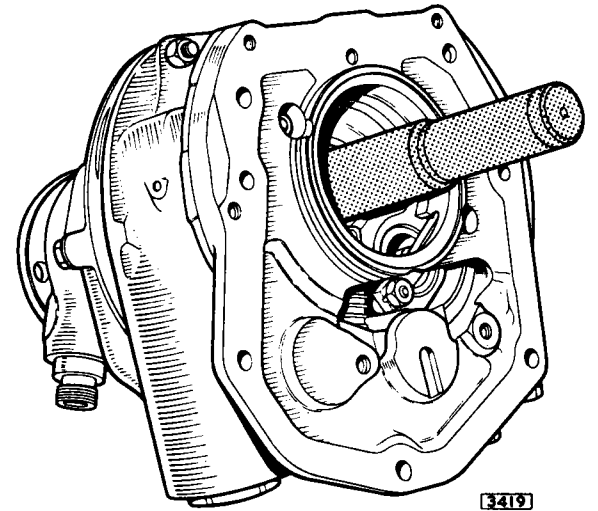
Using the dummy mainshaft Tool No. L.185A
